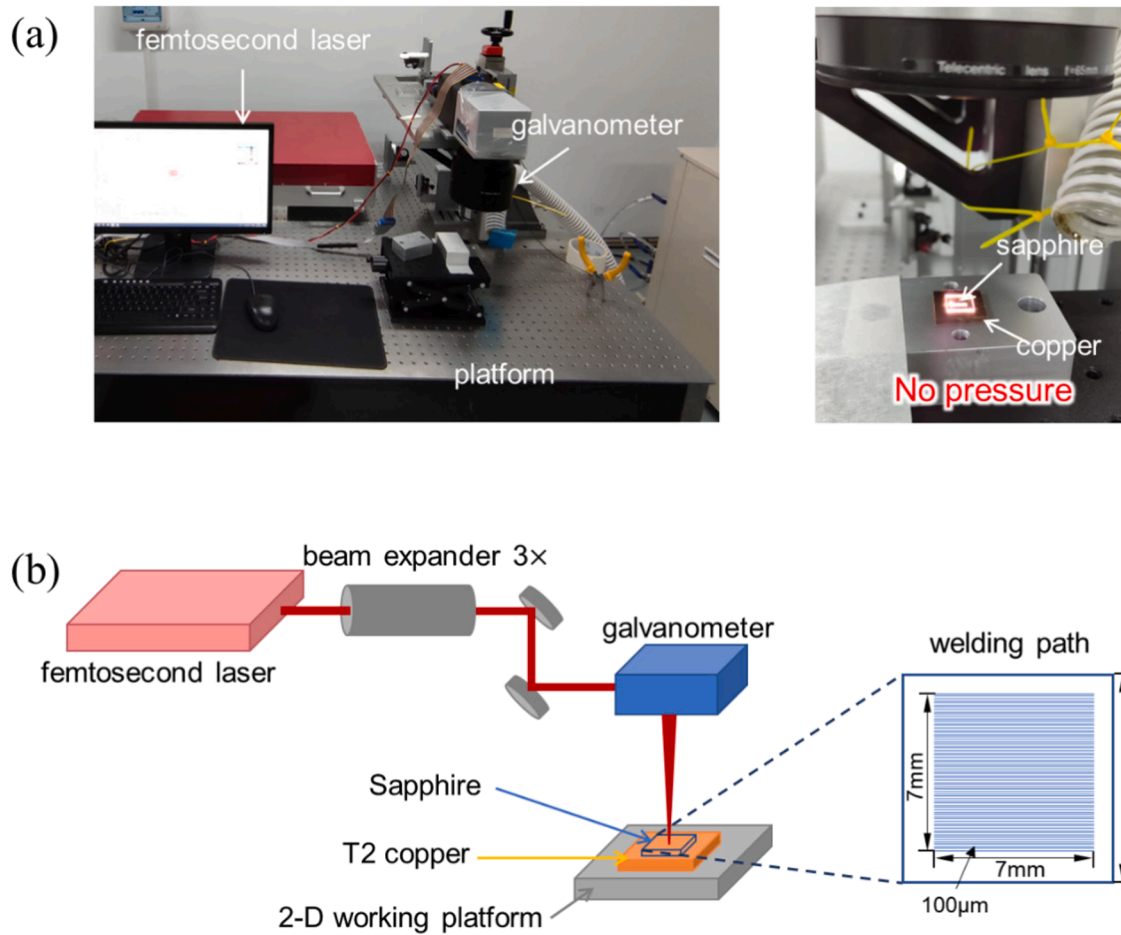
Schematic diagrams for (a) the test scenario of femtosecond laser micromachining and (b) femtosecond laser-induced micro-welding process.
